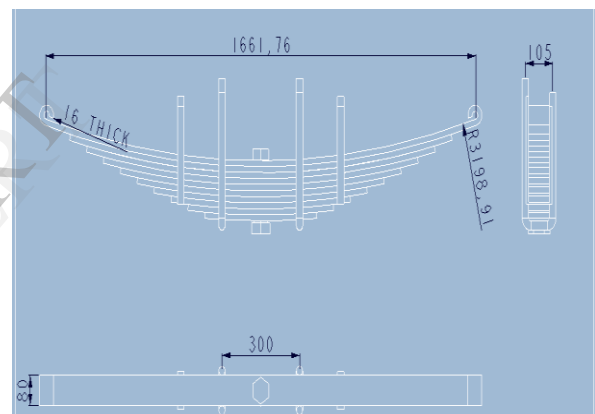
Showing 2D Drawing of Leaf Spring Created in AutoCAD
